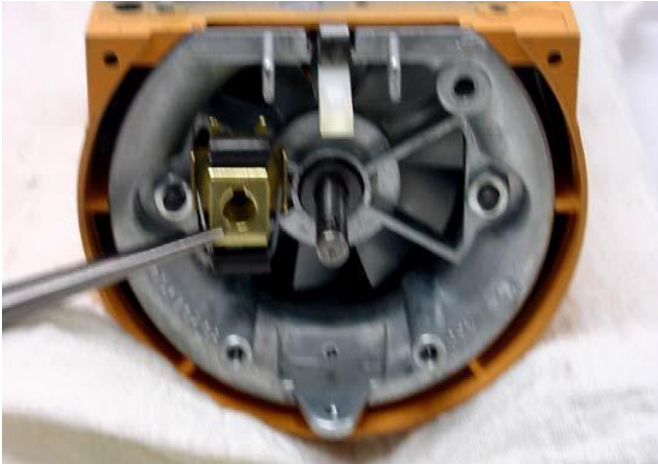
Secure the pivot screw and tension washer to the motor housing.
